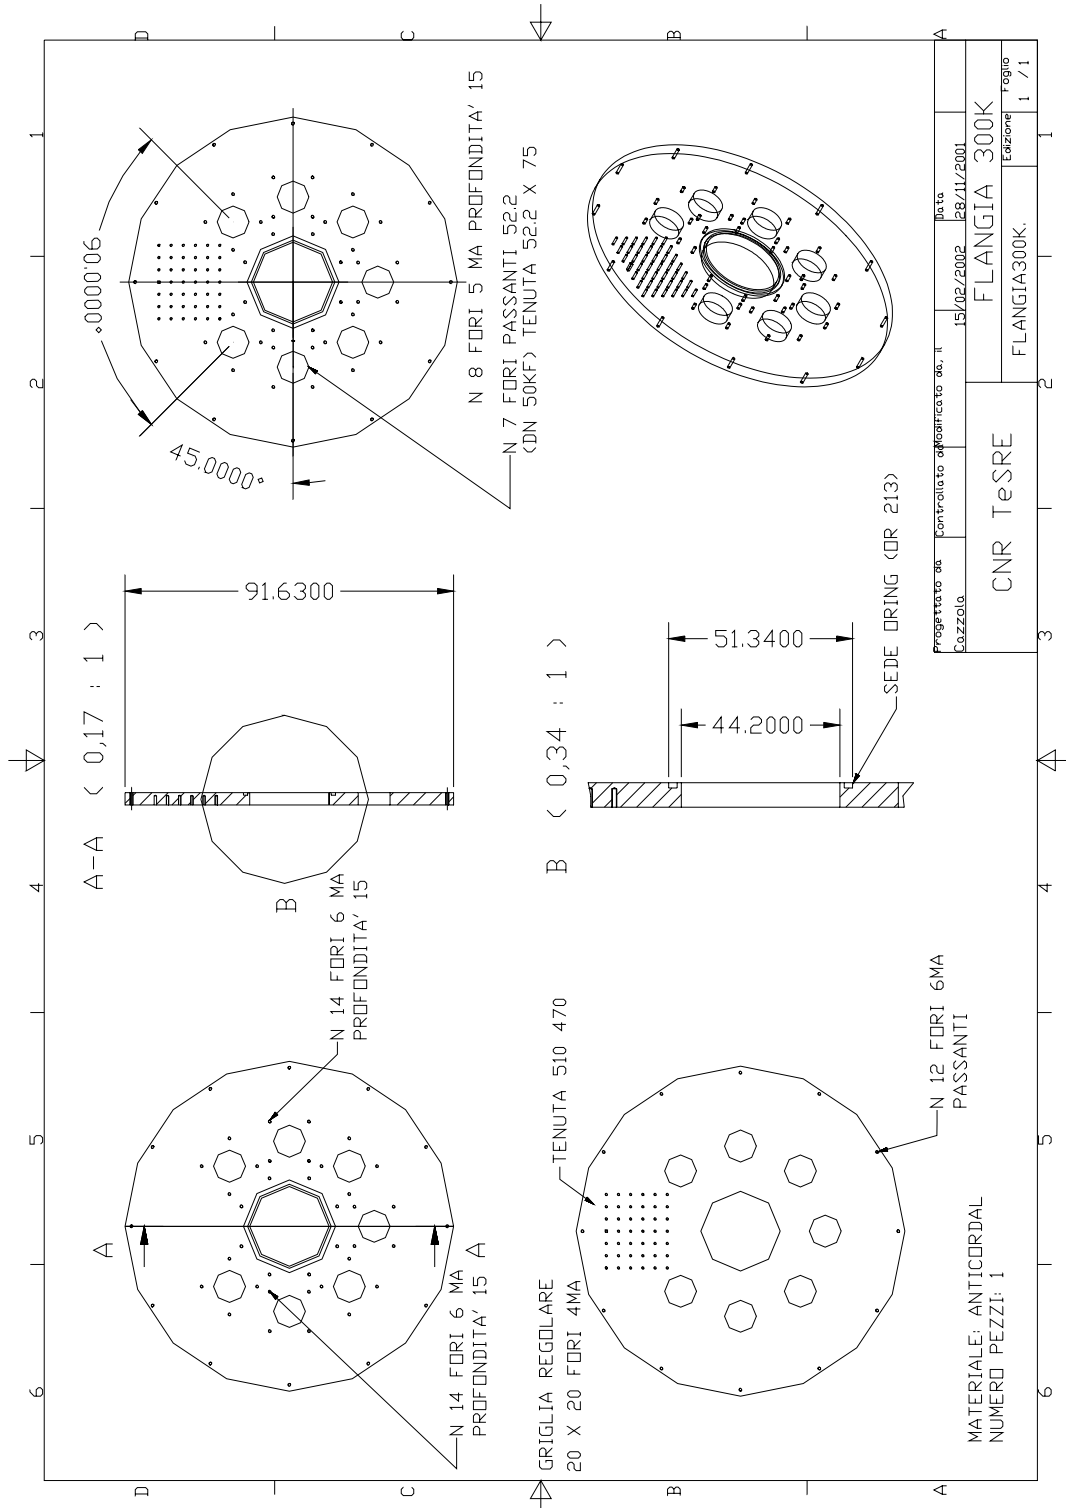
Drawing of the 300K flange, made of Anticorodal aluminum
